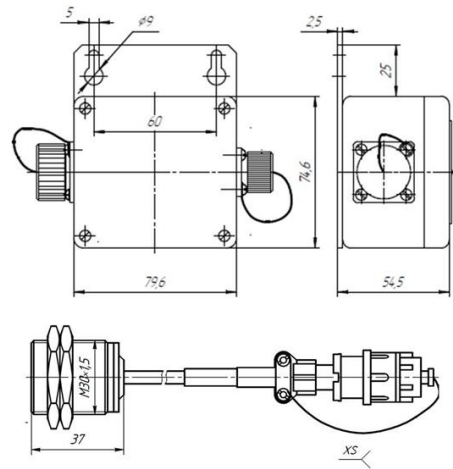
Overall drawing of the DPS-140(I), Kit #1
